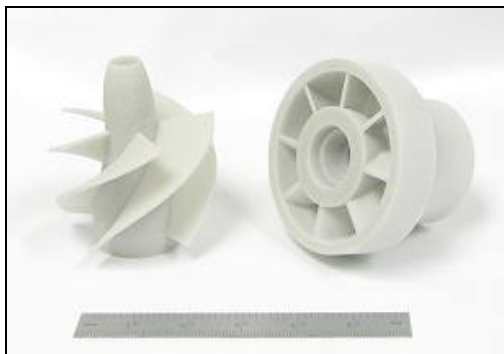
SLS Model Impeller and Stator/Nozzle Pieces
